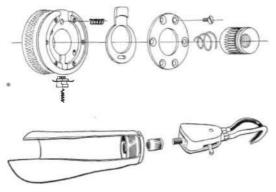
Hosmer F-M wrist unit, with exploded view showing arrangement of parts.
